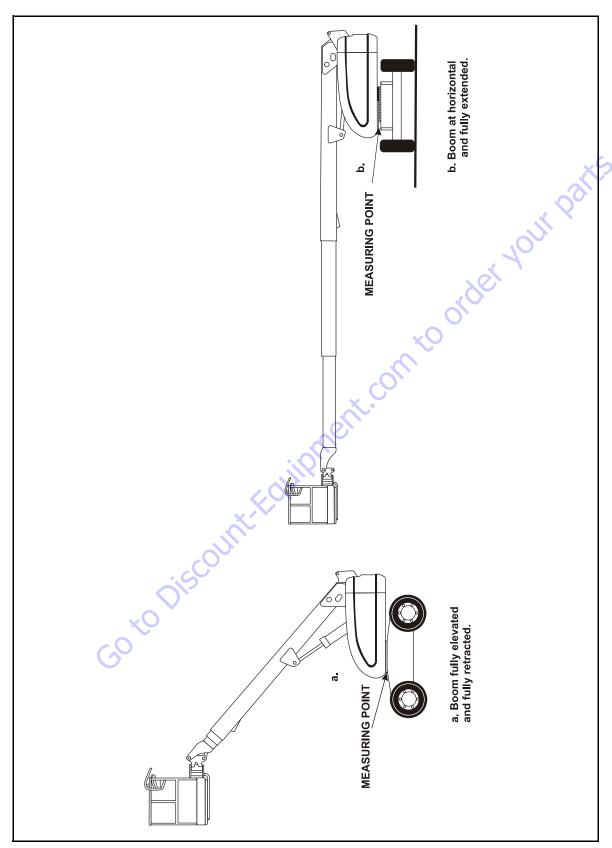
Swing Bearing Tolerance Boom Placement
